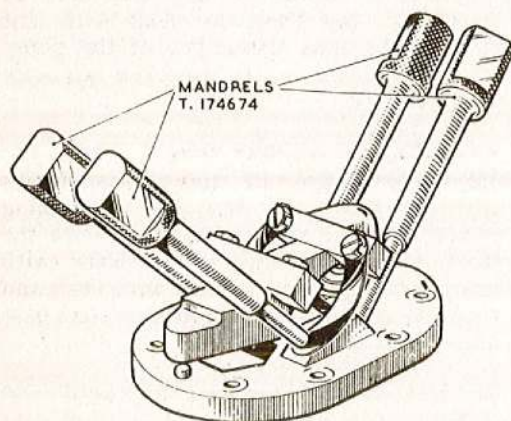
Checking pre-load of rocker lever, using mandrels T.174674
